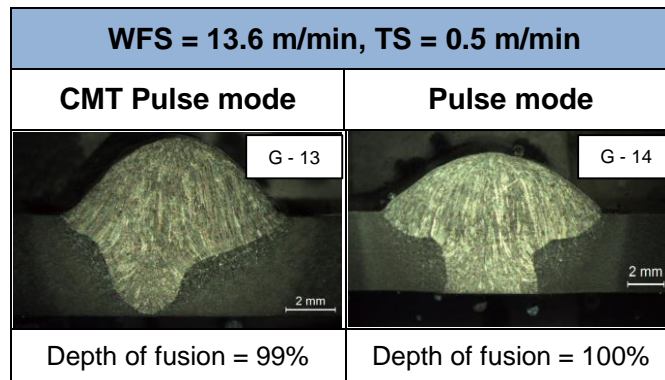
Weld bead cross-section at constant WFS of 13.6 m/min, TS of 0.5 m/min and different welding modes in 4 mm thick plate
